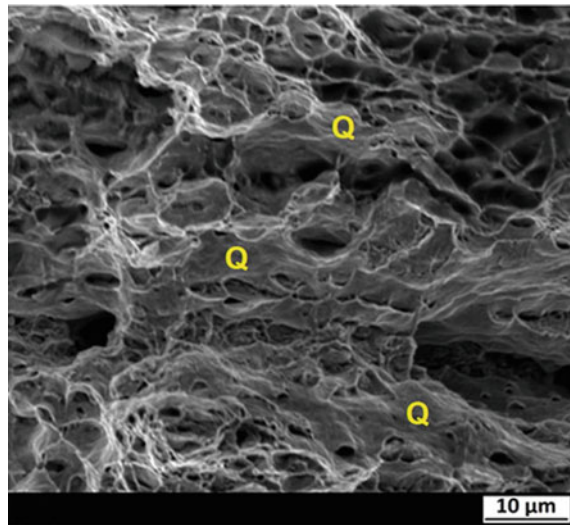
Quasi-cleavage (Q) fracture on the fracture surface of DP600 tested under quasi-static condition
